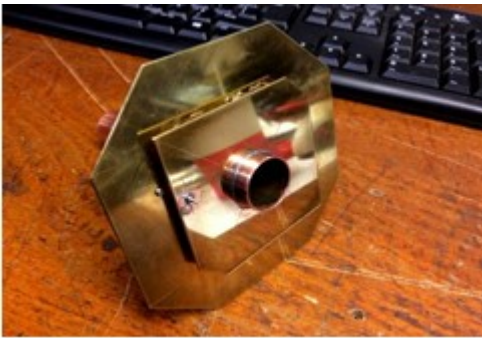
Soldering the patch using 2 x 1.5mm thick aluminium plates as spacers.
